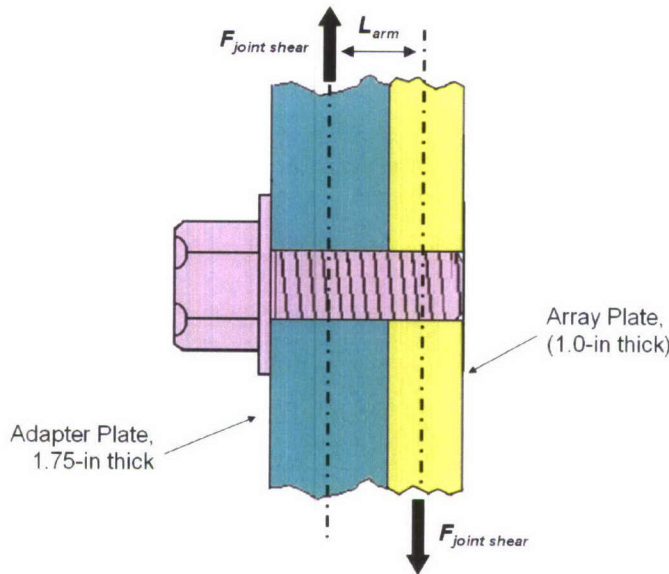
Eccentric Shear Loading Path for Adapter-Plate-to-Array Screws
